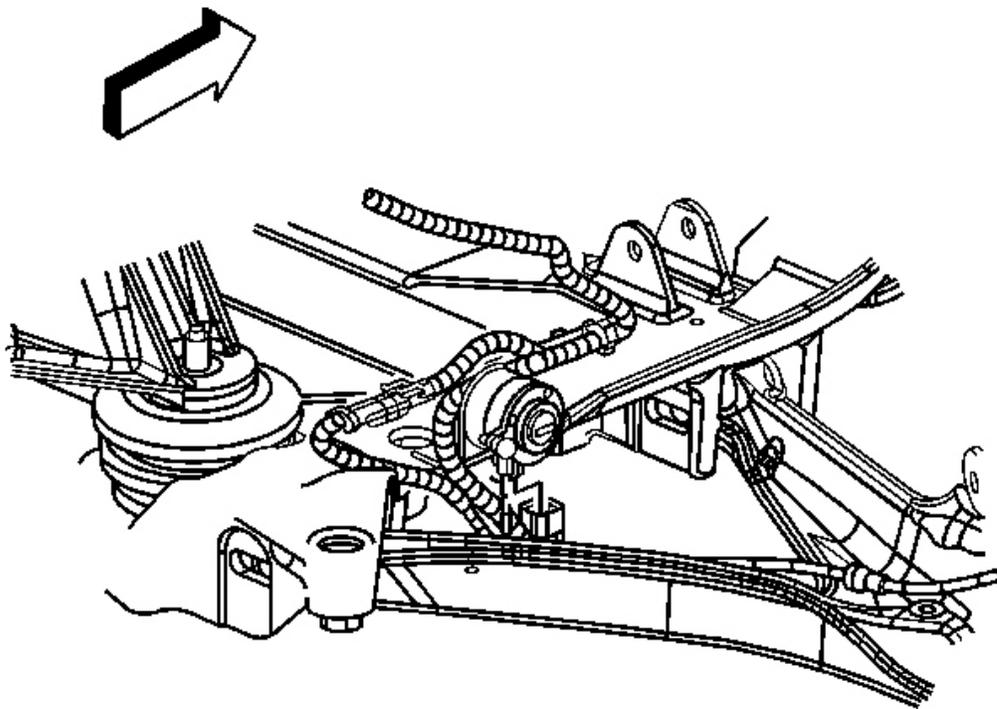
View Of Road Sensing Suspension Position Sensor Links & Lower Control Arm
